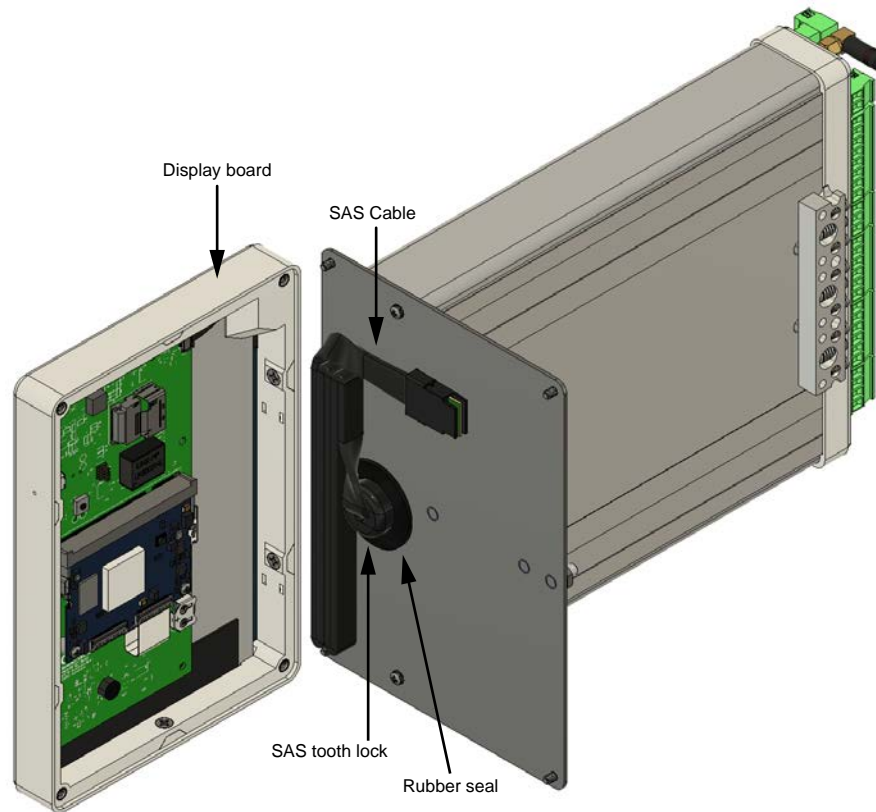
QRATE Scanner 3300 display assembly and main enclosure assembly.
